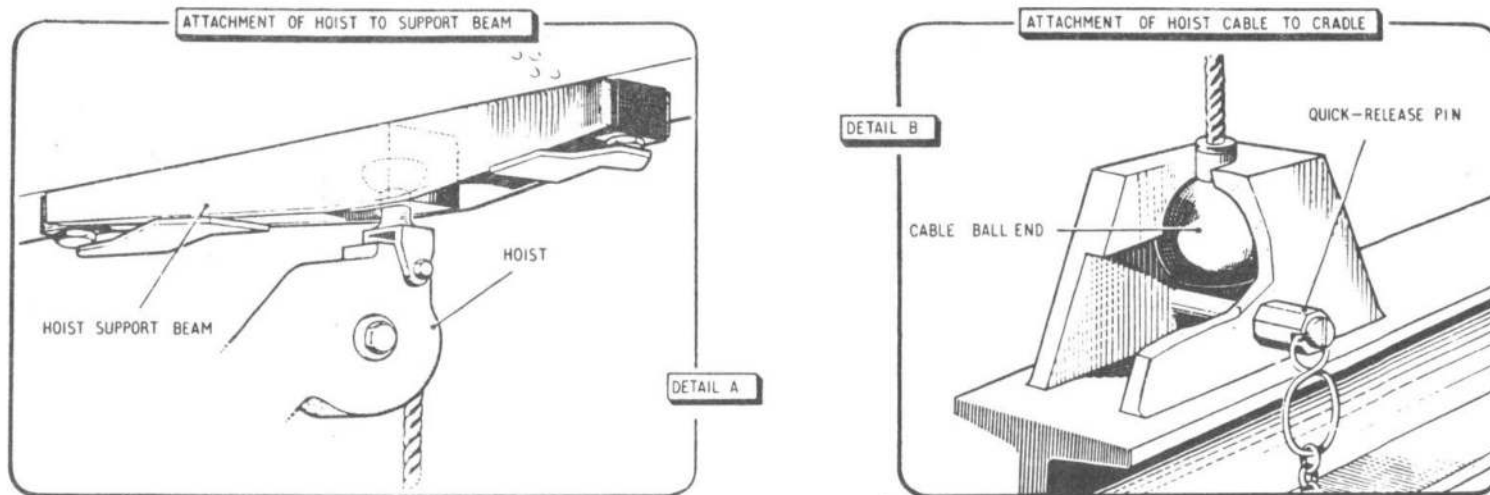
No. 1. E.C.U. REMOVAL AND ASSEMBLY EQUIPMENT
